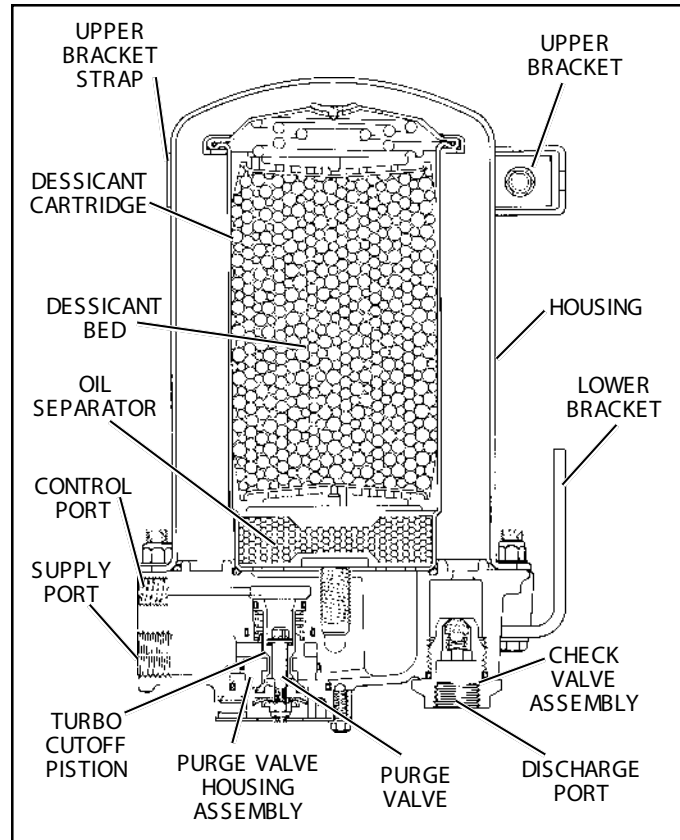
AD-9 AIR DRYER SECTIONAL VIEW
